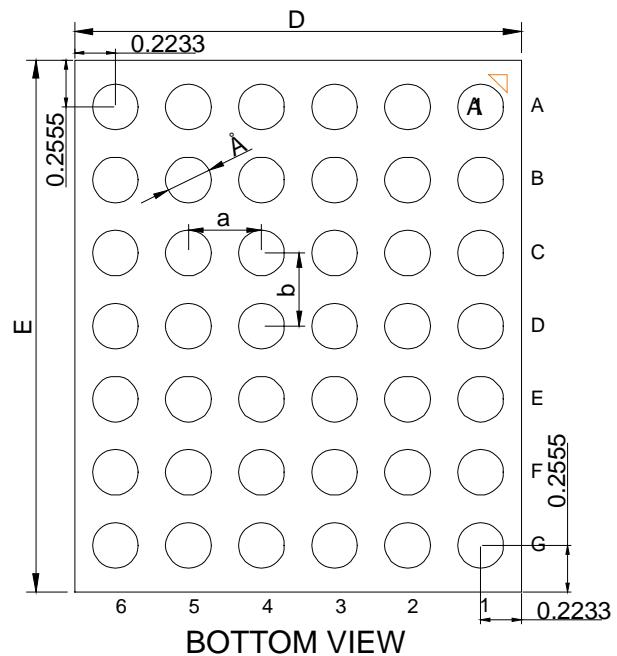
Recommended PCB Layout CS30 (GW1N-1)
